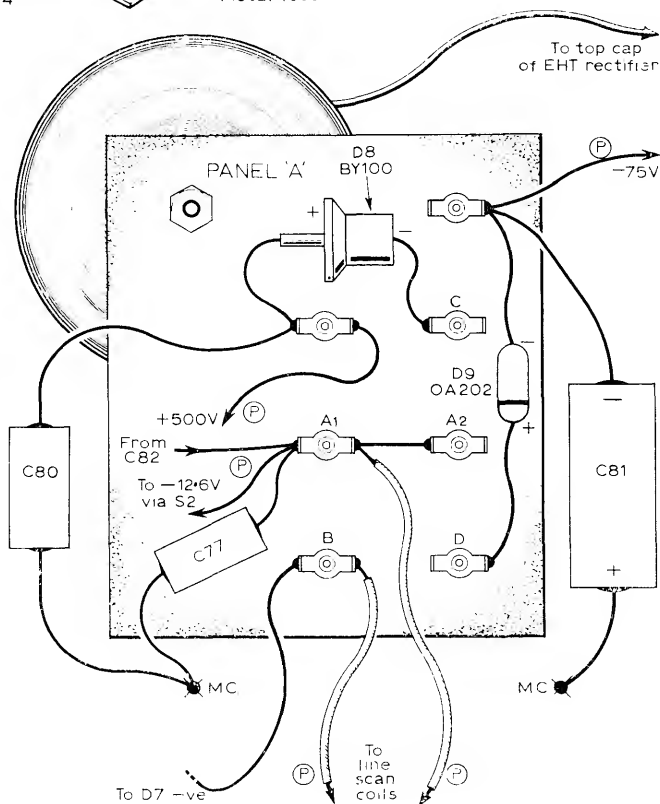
Component wiring and connections on panel "A" of the transformer T7.
